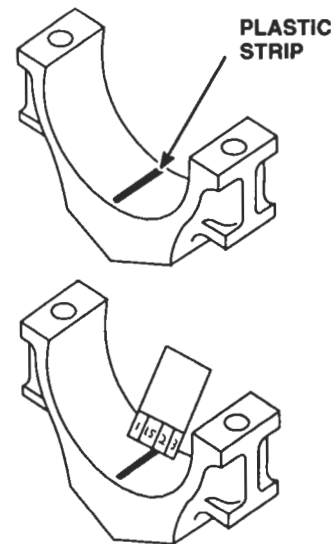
Measuring Bearing-to-Crankshaft Clearance with Plastic Strip
